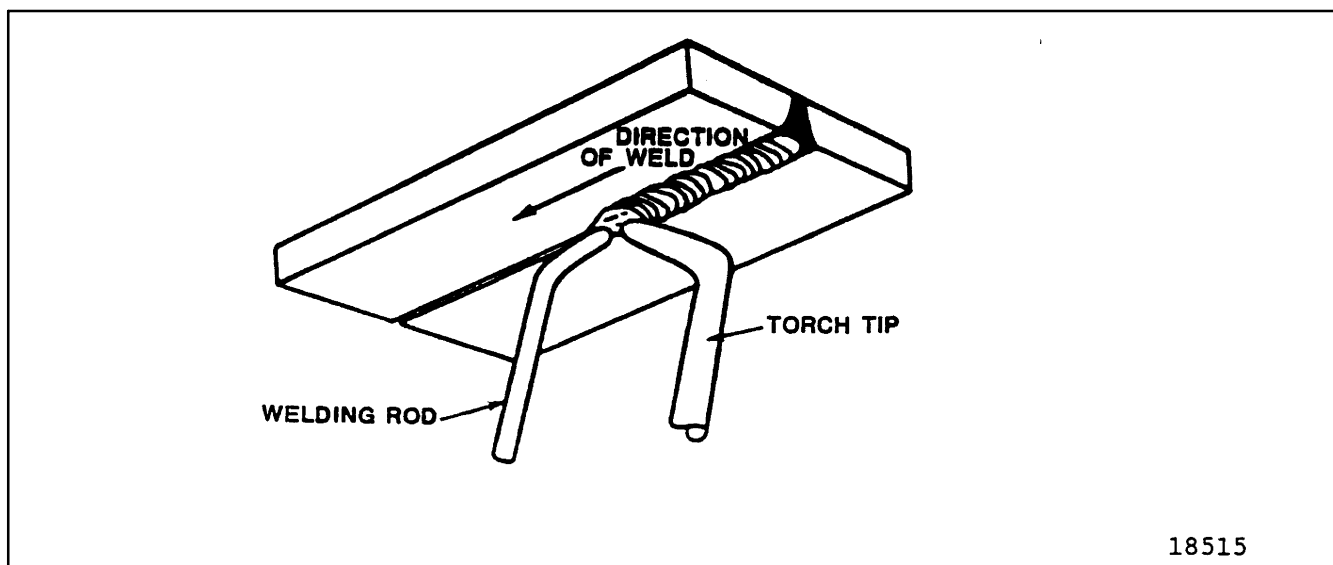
Welding a Butt Joint in the Overhead Position
